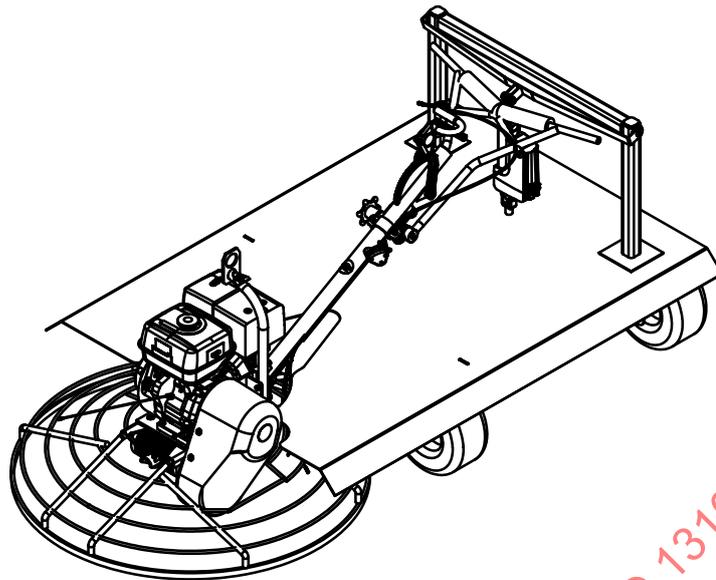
Example of pedestrian operated machine secured to the test fixture for vibration measurement
